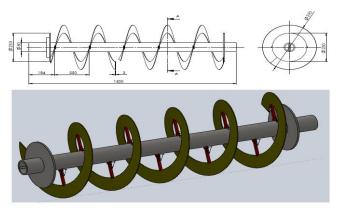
Flight stage 1– Spiral wide flights with weldment bracket
